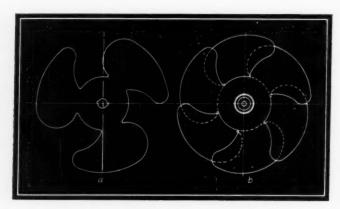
Blades of welded aluminum propeller-type fan are contoured for quiet operation
